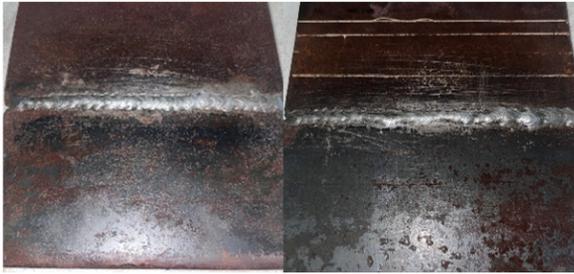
Welded Lap joint samples at current (a) 116 A and (b) 152 A
